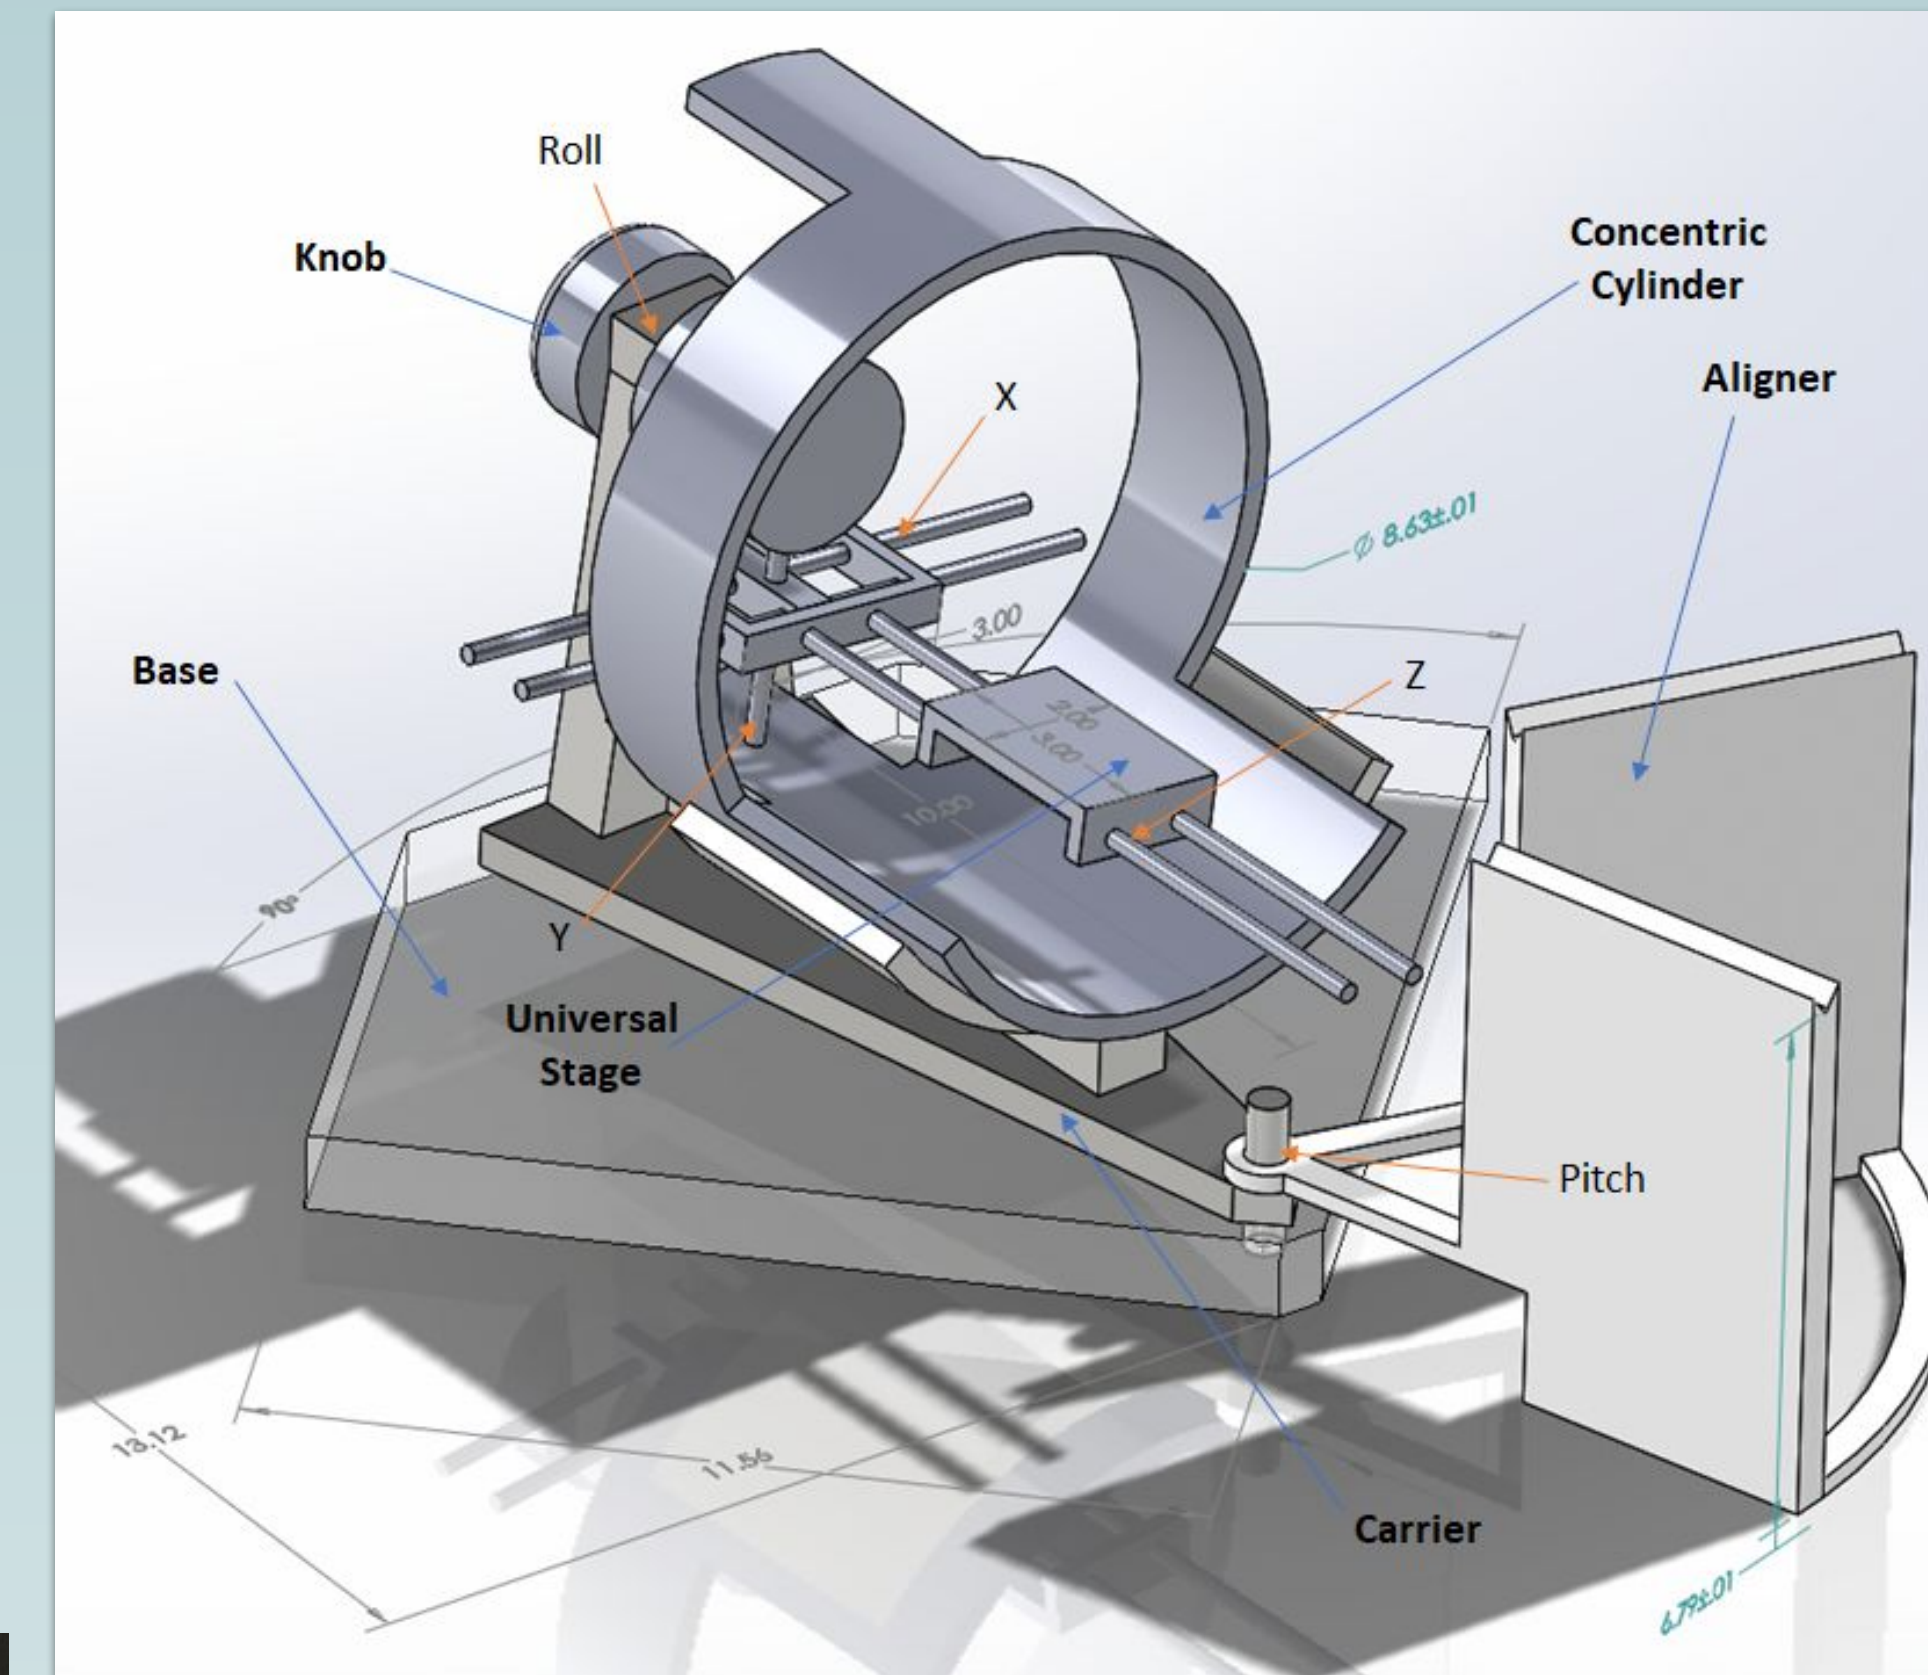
Solidwork drawing of final prototype: Diamond RRaTS
